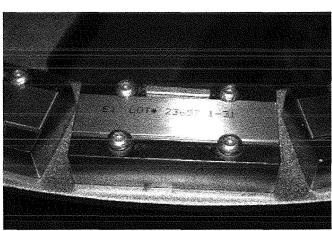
Almen strips, Mini-strips mounted on Almen holders on the rotary table.
